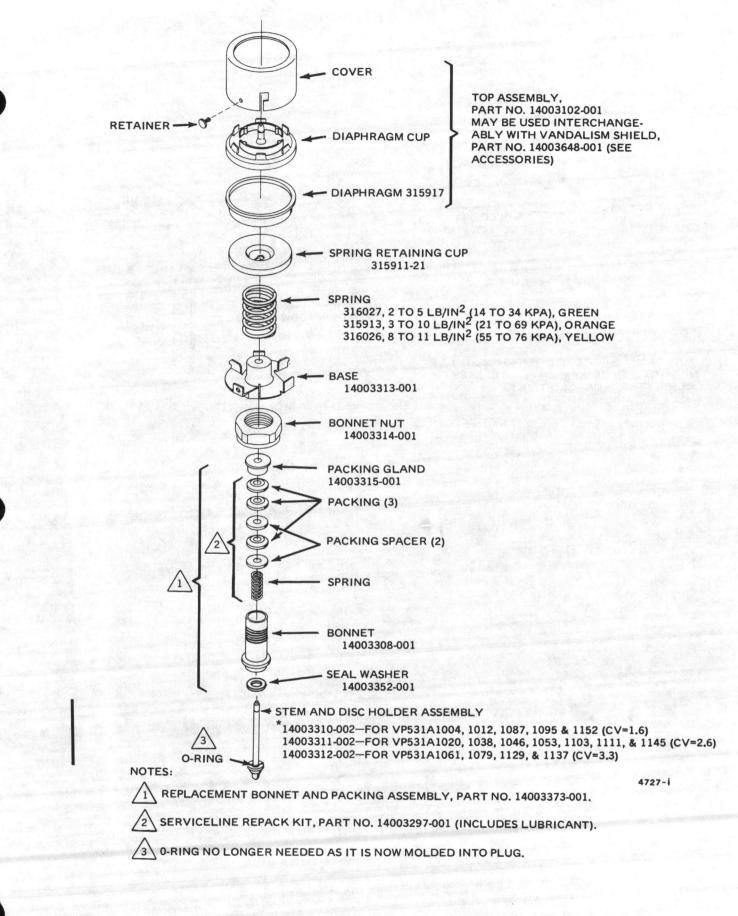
VP531A Top and Insert Assembly Exploded View.
